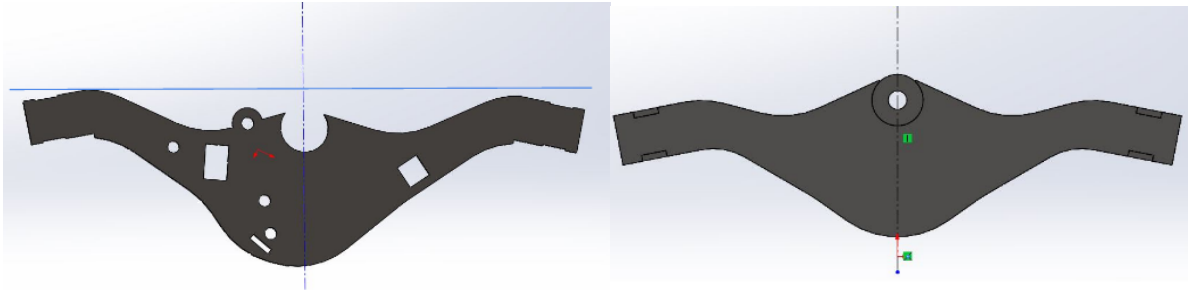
Old design of lower control arm(left), New design of lower control arm(right)
